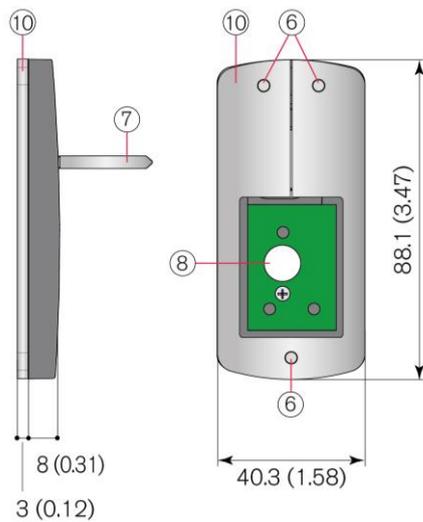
Dimensions of the GAT NET.Lock BoltSet 7320
